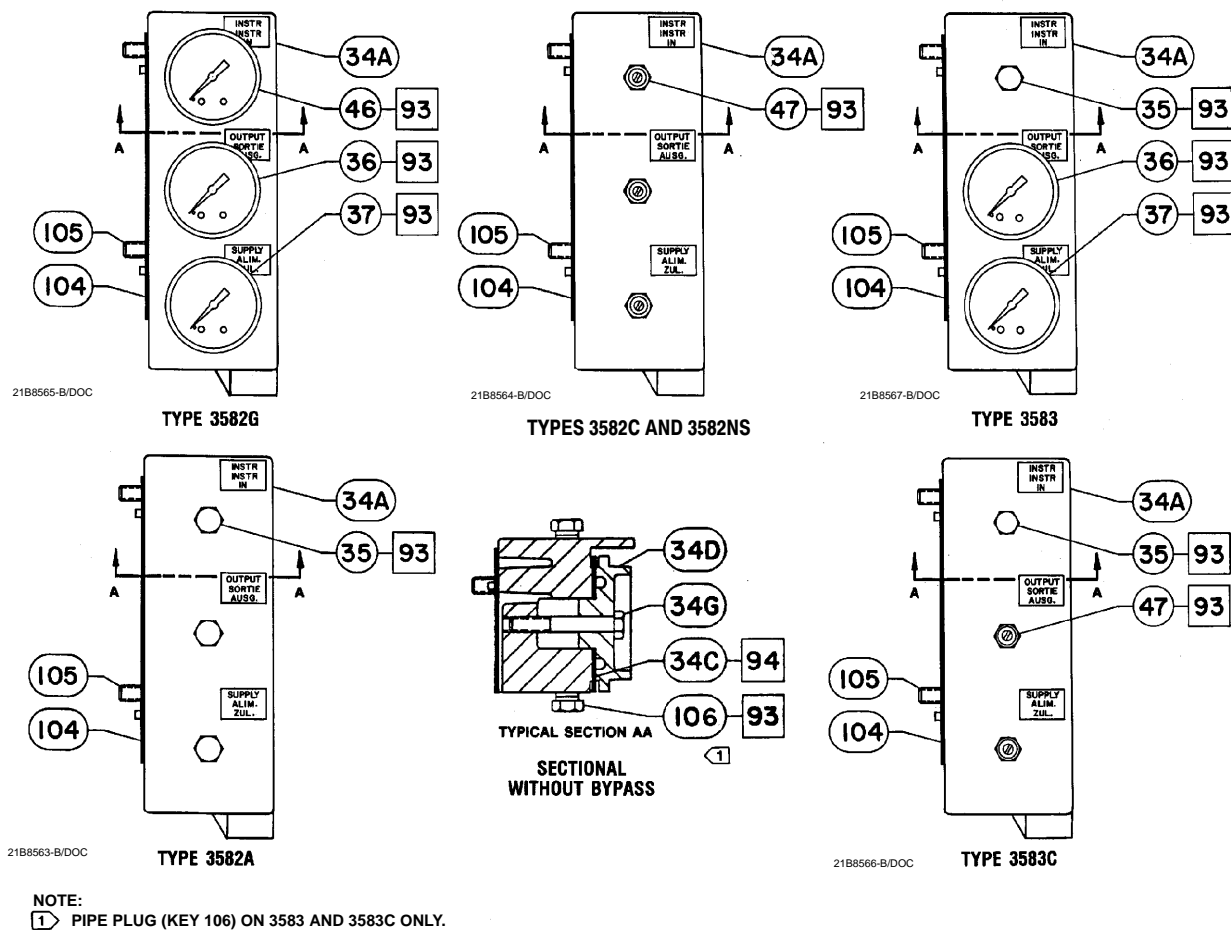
3582 and 3583 Series Block Assemblies without Bypass
